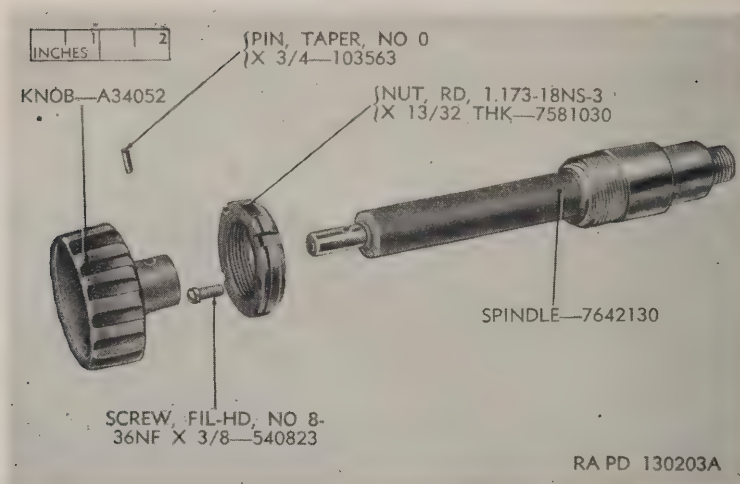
Components of the spindle assembly—plotting boards M5 and M5A2.
